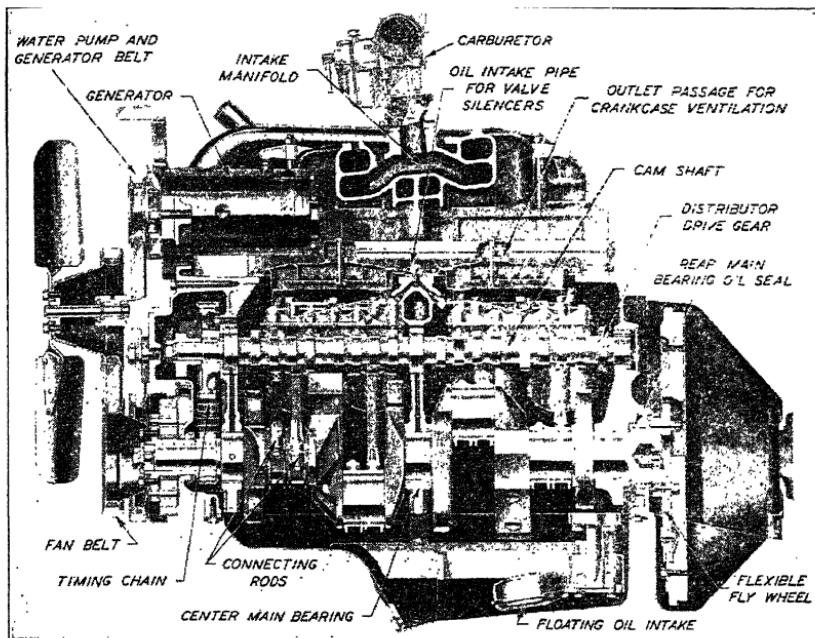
Longitudinal Cross Sectioned View of 1941 Cadillac Engine
